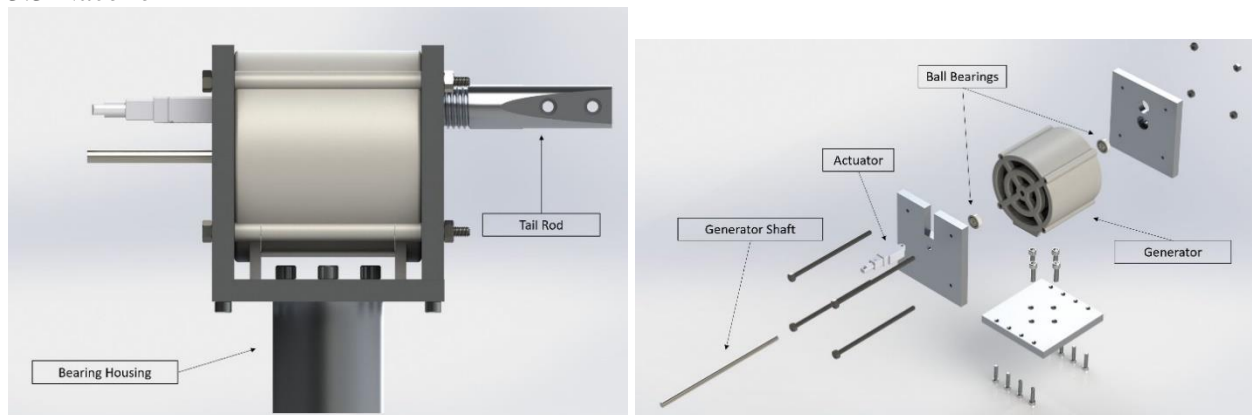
Side view of Nacelle (Left) & Exploded view of Nacelle (Right)
